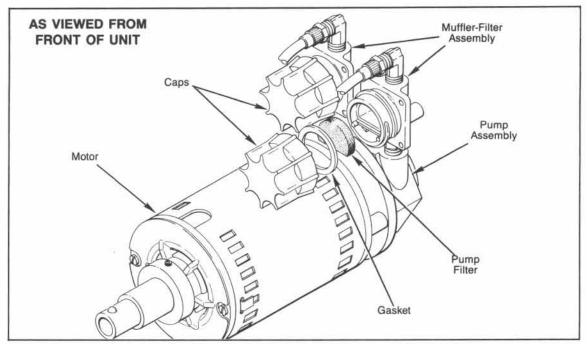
LOCATION OF FILTERS ON MOTOR/PUMP ASSEMBLY (PRC-621 AND 630 ONLY)
